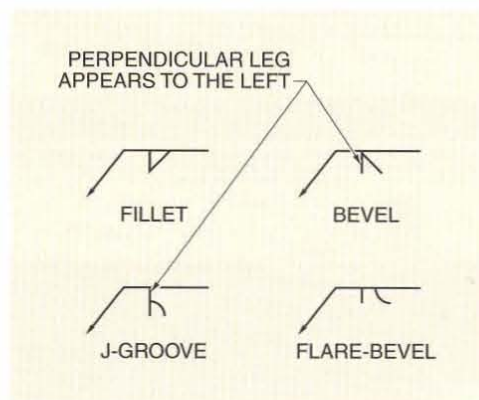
For fillet, bevel, J-groove, and flare-bevel groove joints, the perpendicular leg always appears to the left of the weld symbol.
